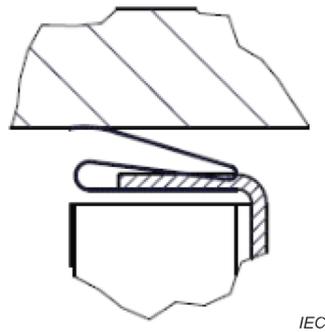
Detail H of Figure D.3: contact between plane and housing
